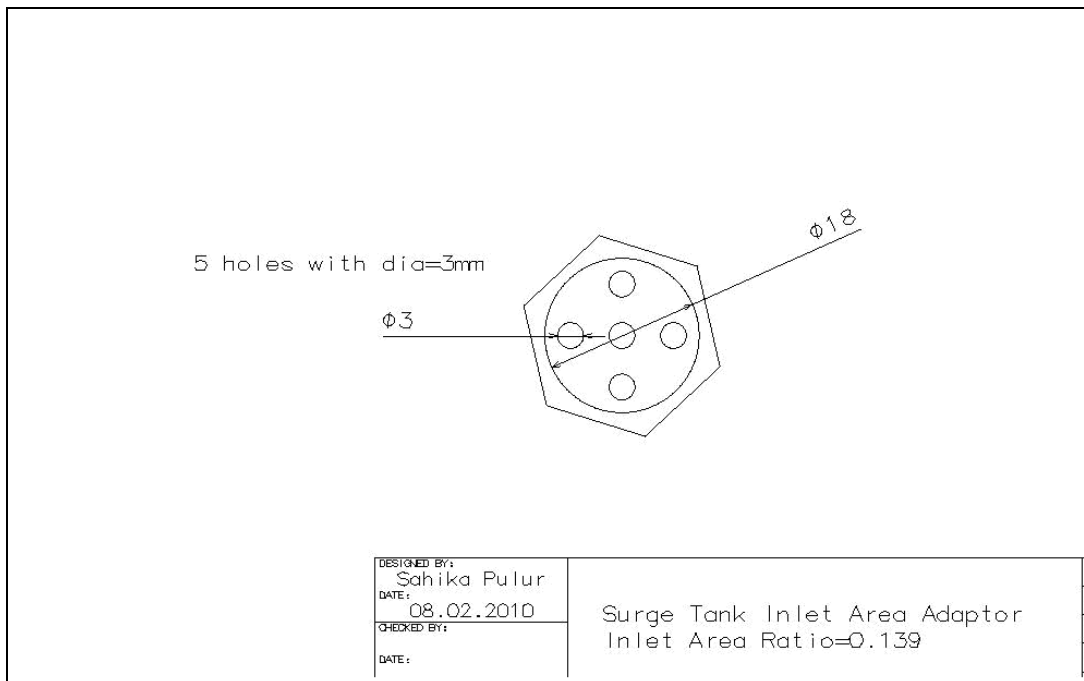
Technical Drawing of Adaptor with $r=0.14$
